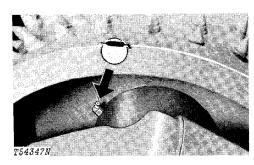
Feed Roll Final Drive Shaft Upper Bearing (2 Points) (Right Side Shown)
